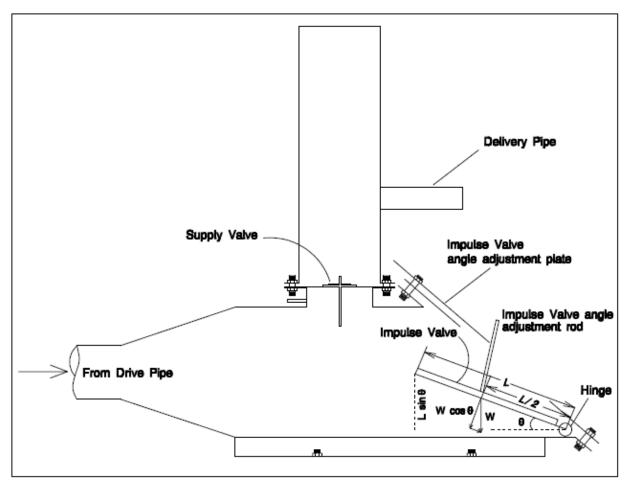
Partial section of typical Hydraulic Ram Pump model
